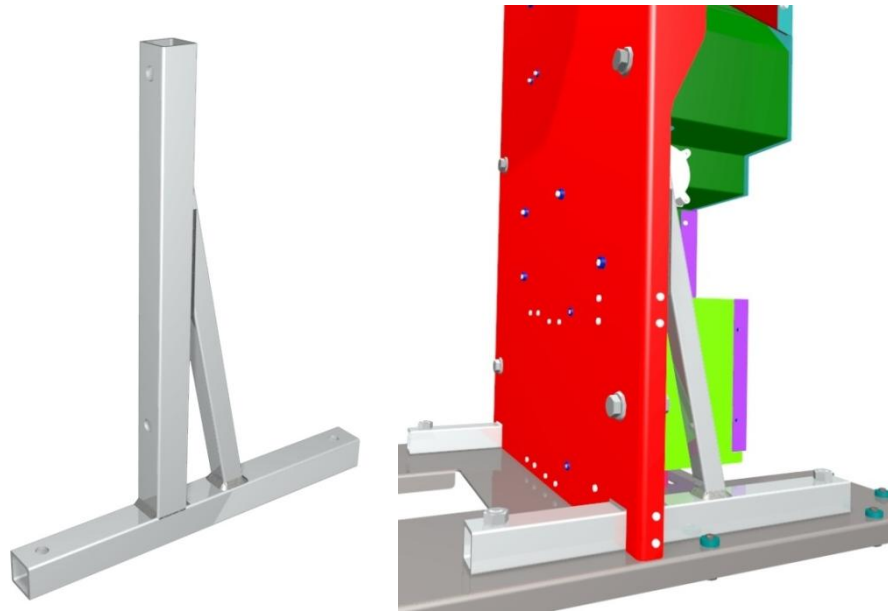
The left figure shows one of the welded aluminum fixtures. In the right figure, the four M10 fasteners used for fixating each aluminum fixture the front plate and base plate can be seen.
